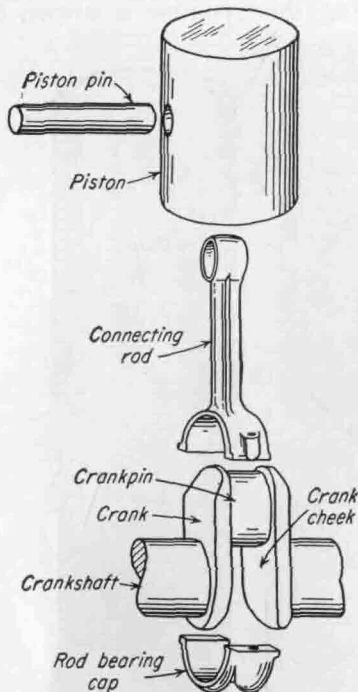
A piston, connecting rod, piston pin, and crankpin on engine crankshaft in disassembled view.
